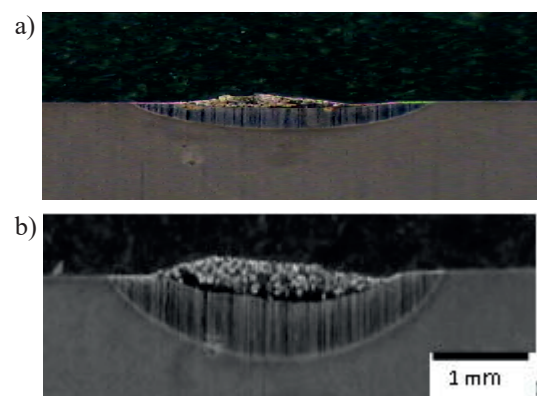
The cross - section of the surface layer of 32CrMoV12-28 alloyed with WC powder, a) laser power 1.6 kW, b) laser power 2.3 kW
